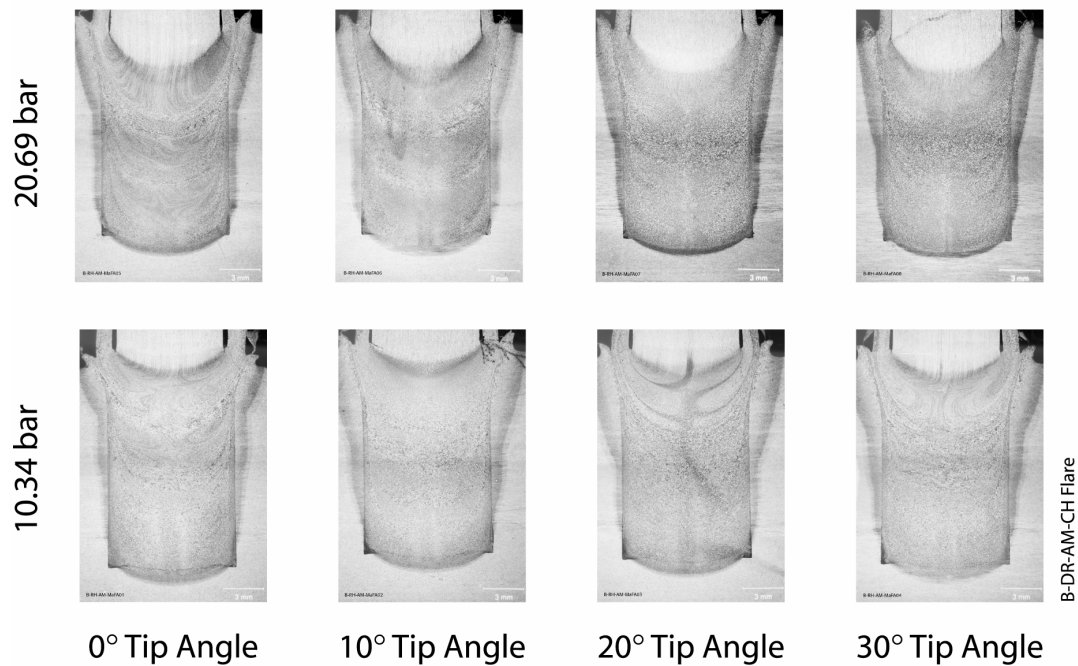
Macrographs of weld matrix with different tip angles.
